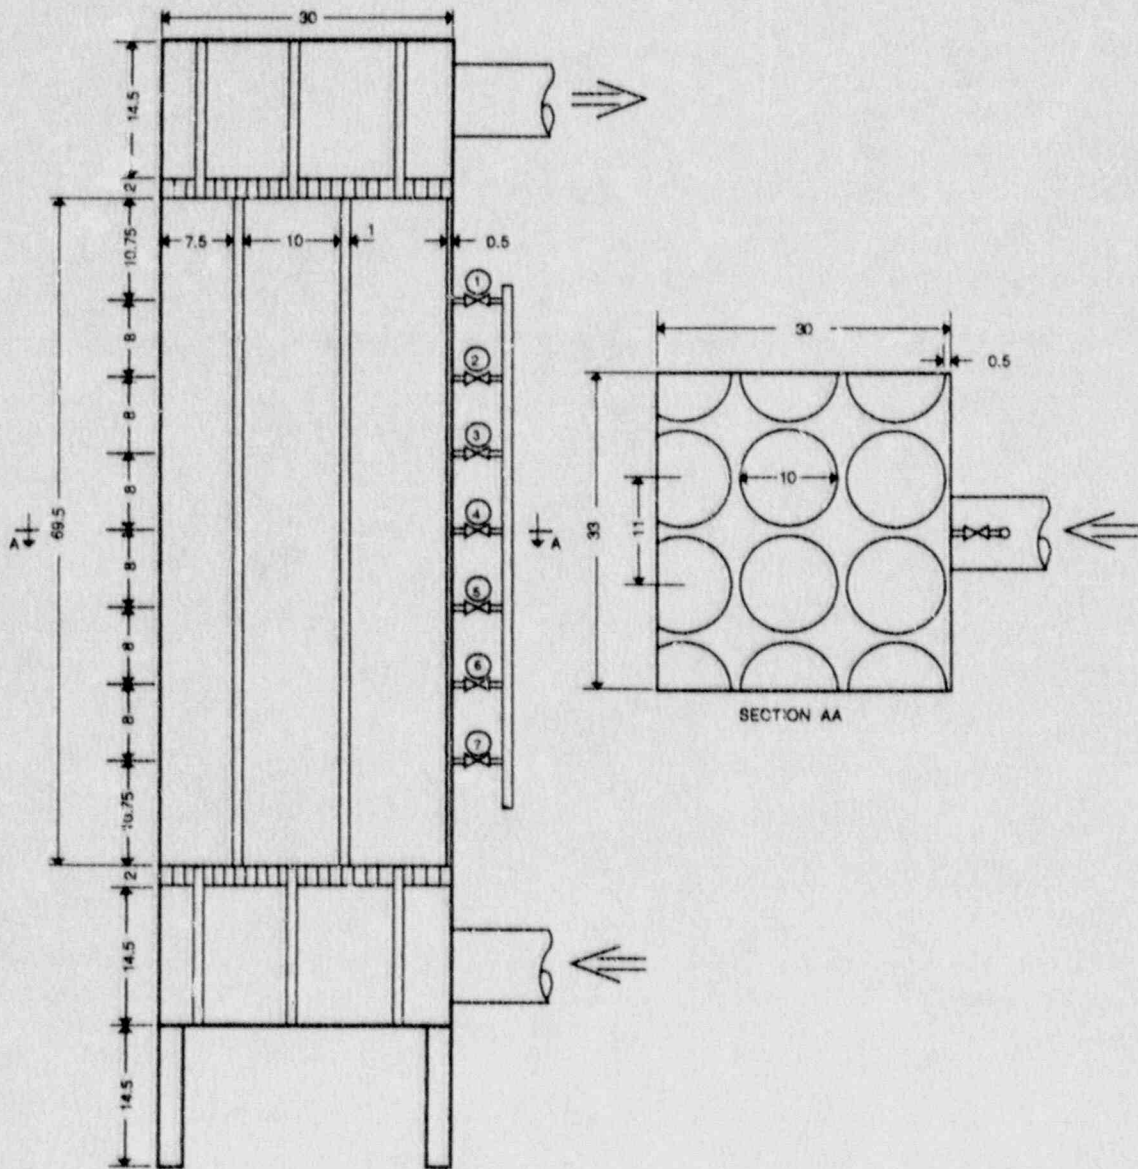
The UCSB VMR full-scale test section. (All dimensions in inches.)
